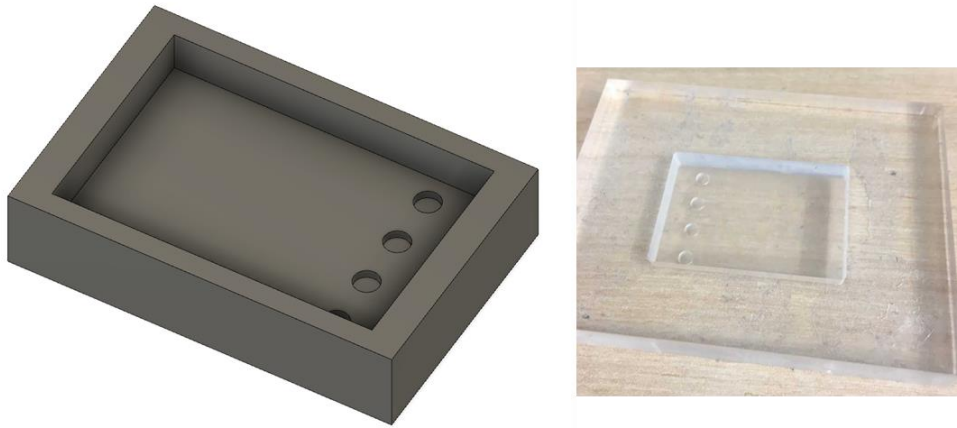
PDMS mould fabricated using photolithography techniques
